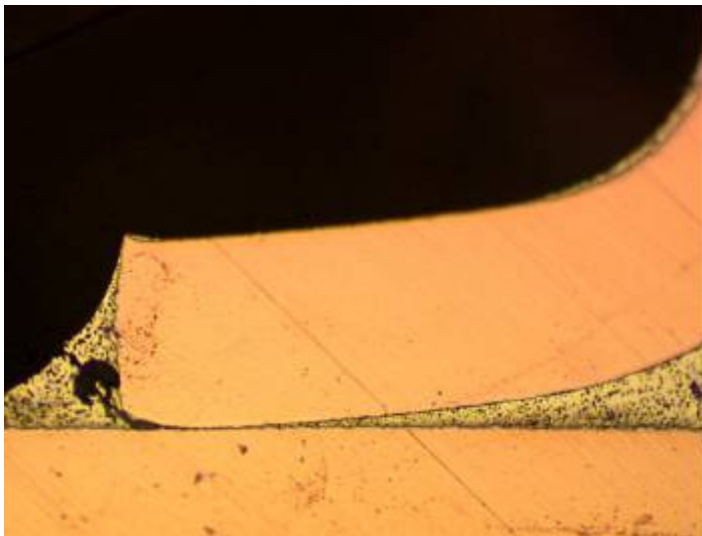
cross section, SN63, U31, left lead solder crack, 200xa
